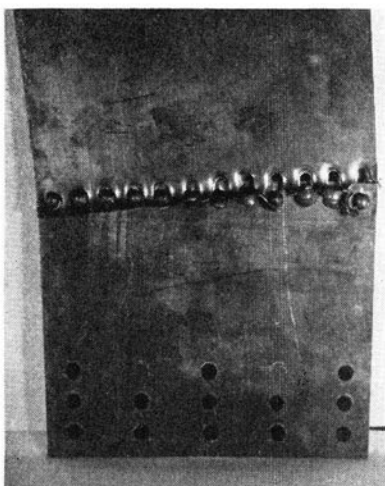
FAILURE BY RIVET BEARING, SPECIMEN BE-5C
